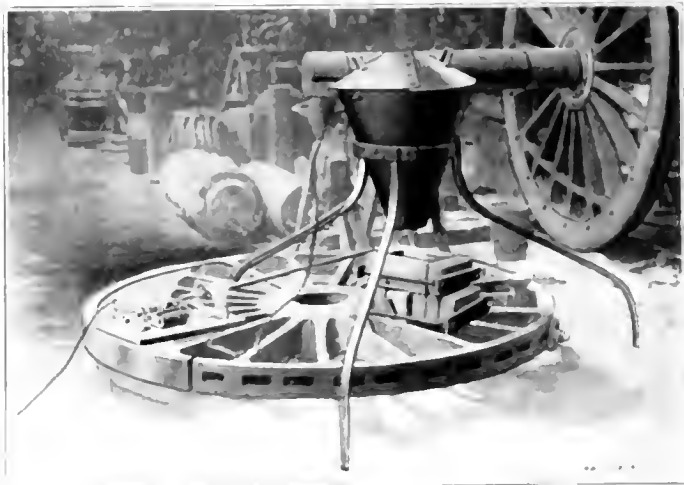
Crucible, Mold, and Ignition Apparatus ready for the Repair of a Broken Driving Wheel Spoke
